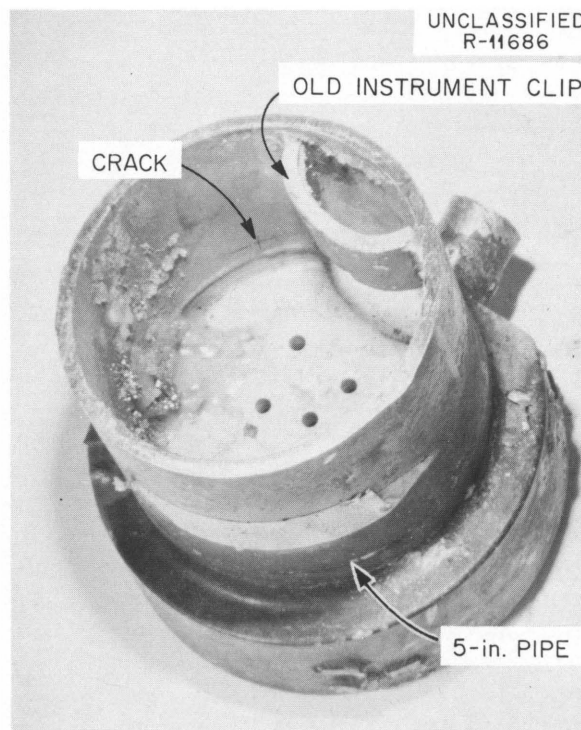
Lower Section of Hydrofluorinator After Failure by Cracking.
